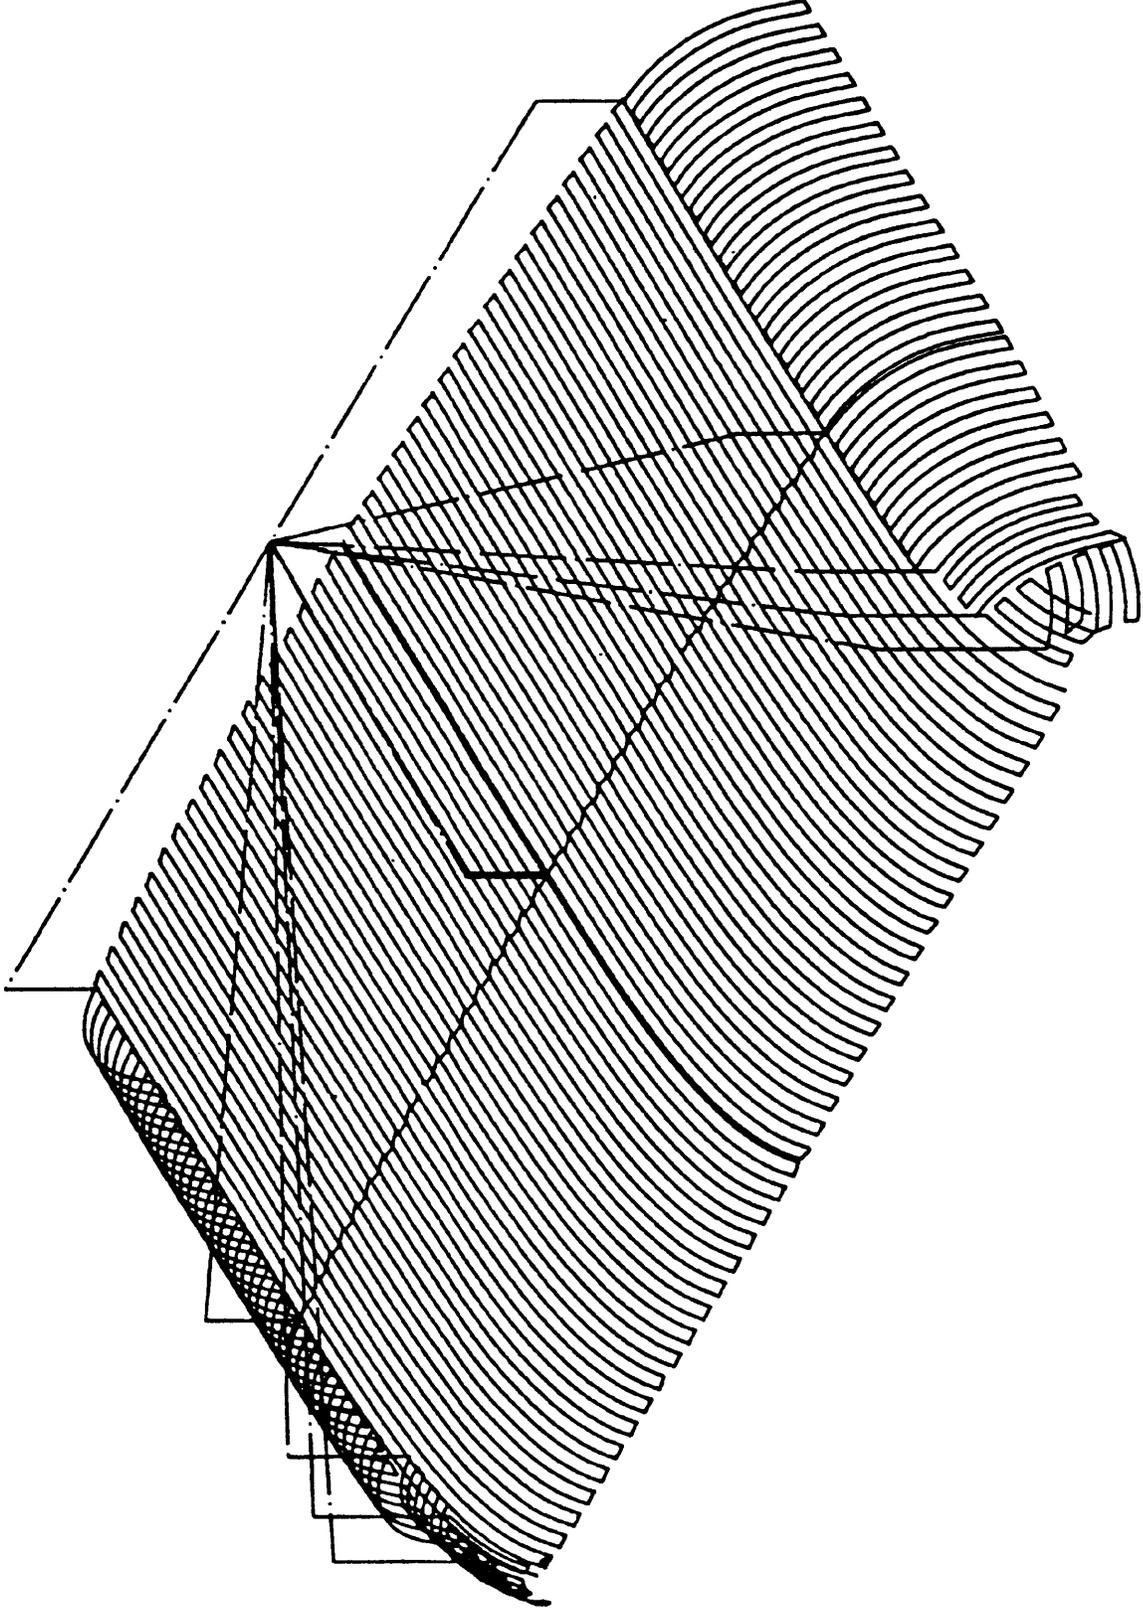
The toolpaths for the finish machining of the cab roof model
